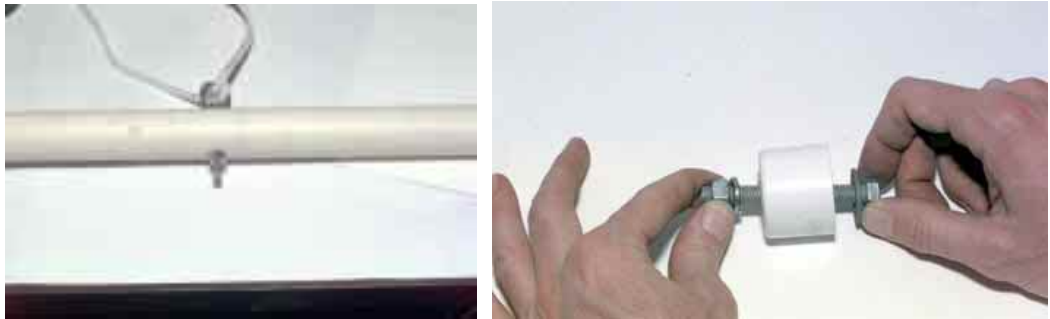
and 8d. Install the eyebolt and the 3/8 in. bolt into the end cap.
